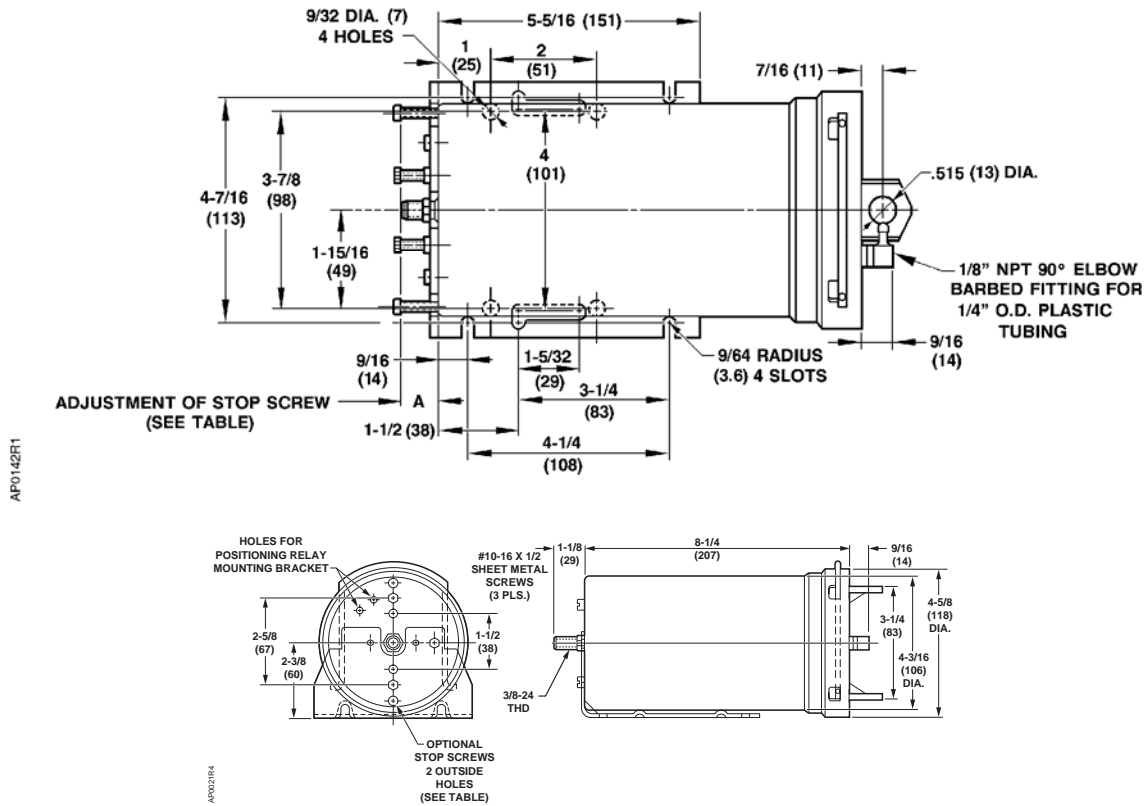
Bracket Mounted Actuator 331-2911 (Typical). Dimensions in Inches (Millimeters).
